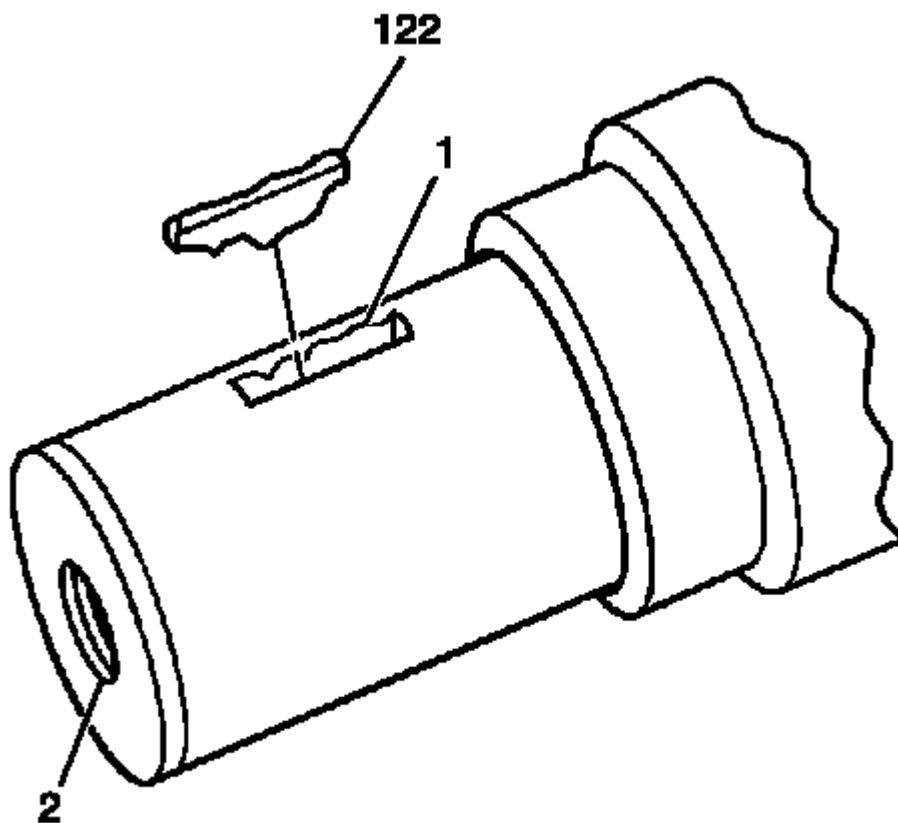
View Of Crankshaft Key, Keyway & Threaded Hole
